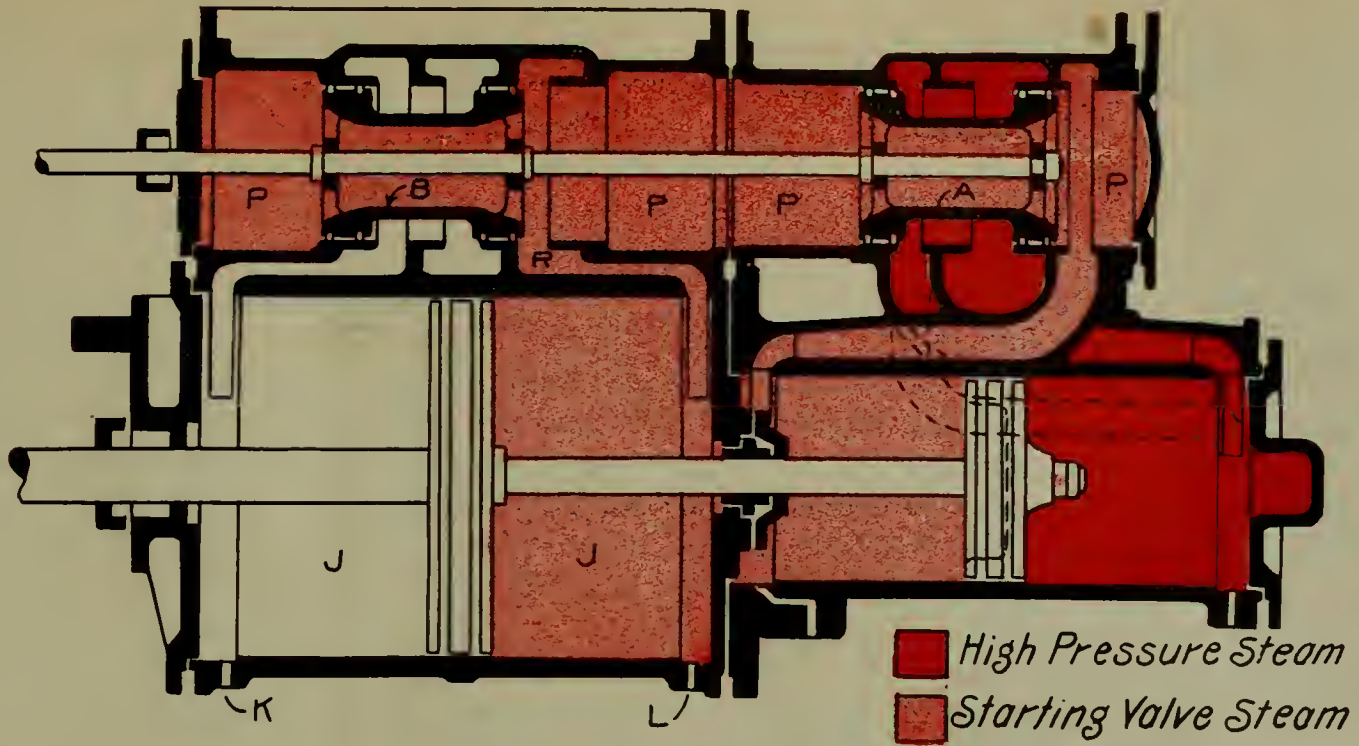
TESTING LOW PRESSURE CYLINDER PACKING.
